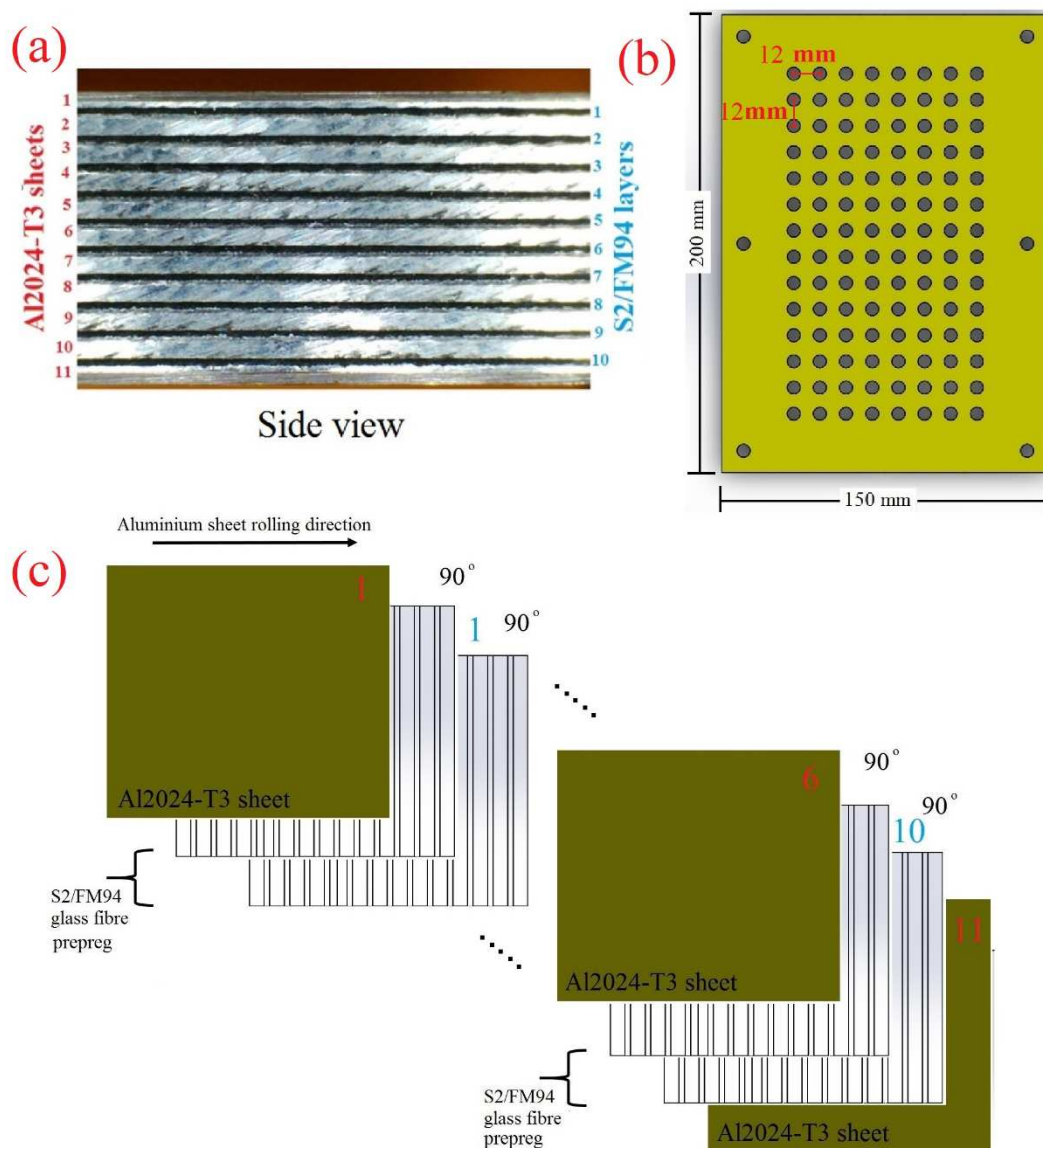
Details of the GLARE® 2B 11/10-0.4 specimen used for the drilling trials (a) Side view [3, 16] (b) Top view, also showing the location of holes to be drilled (c) detailed view showing fibre orientation and rolling direction
